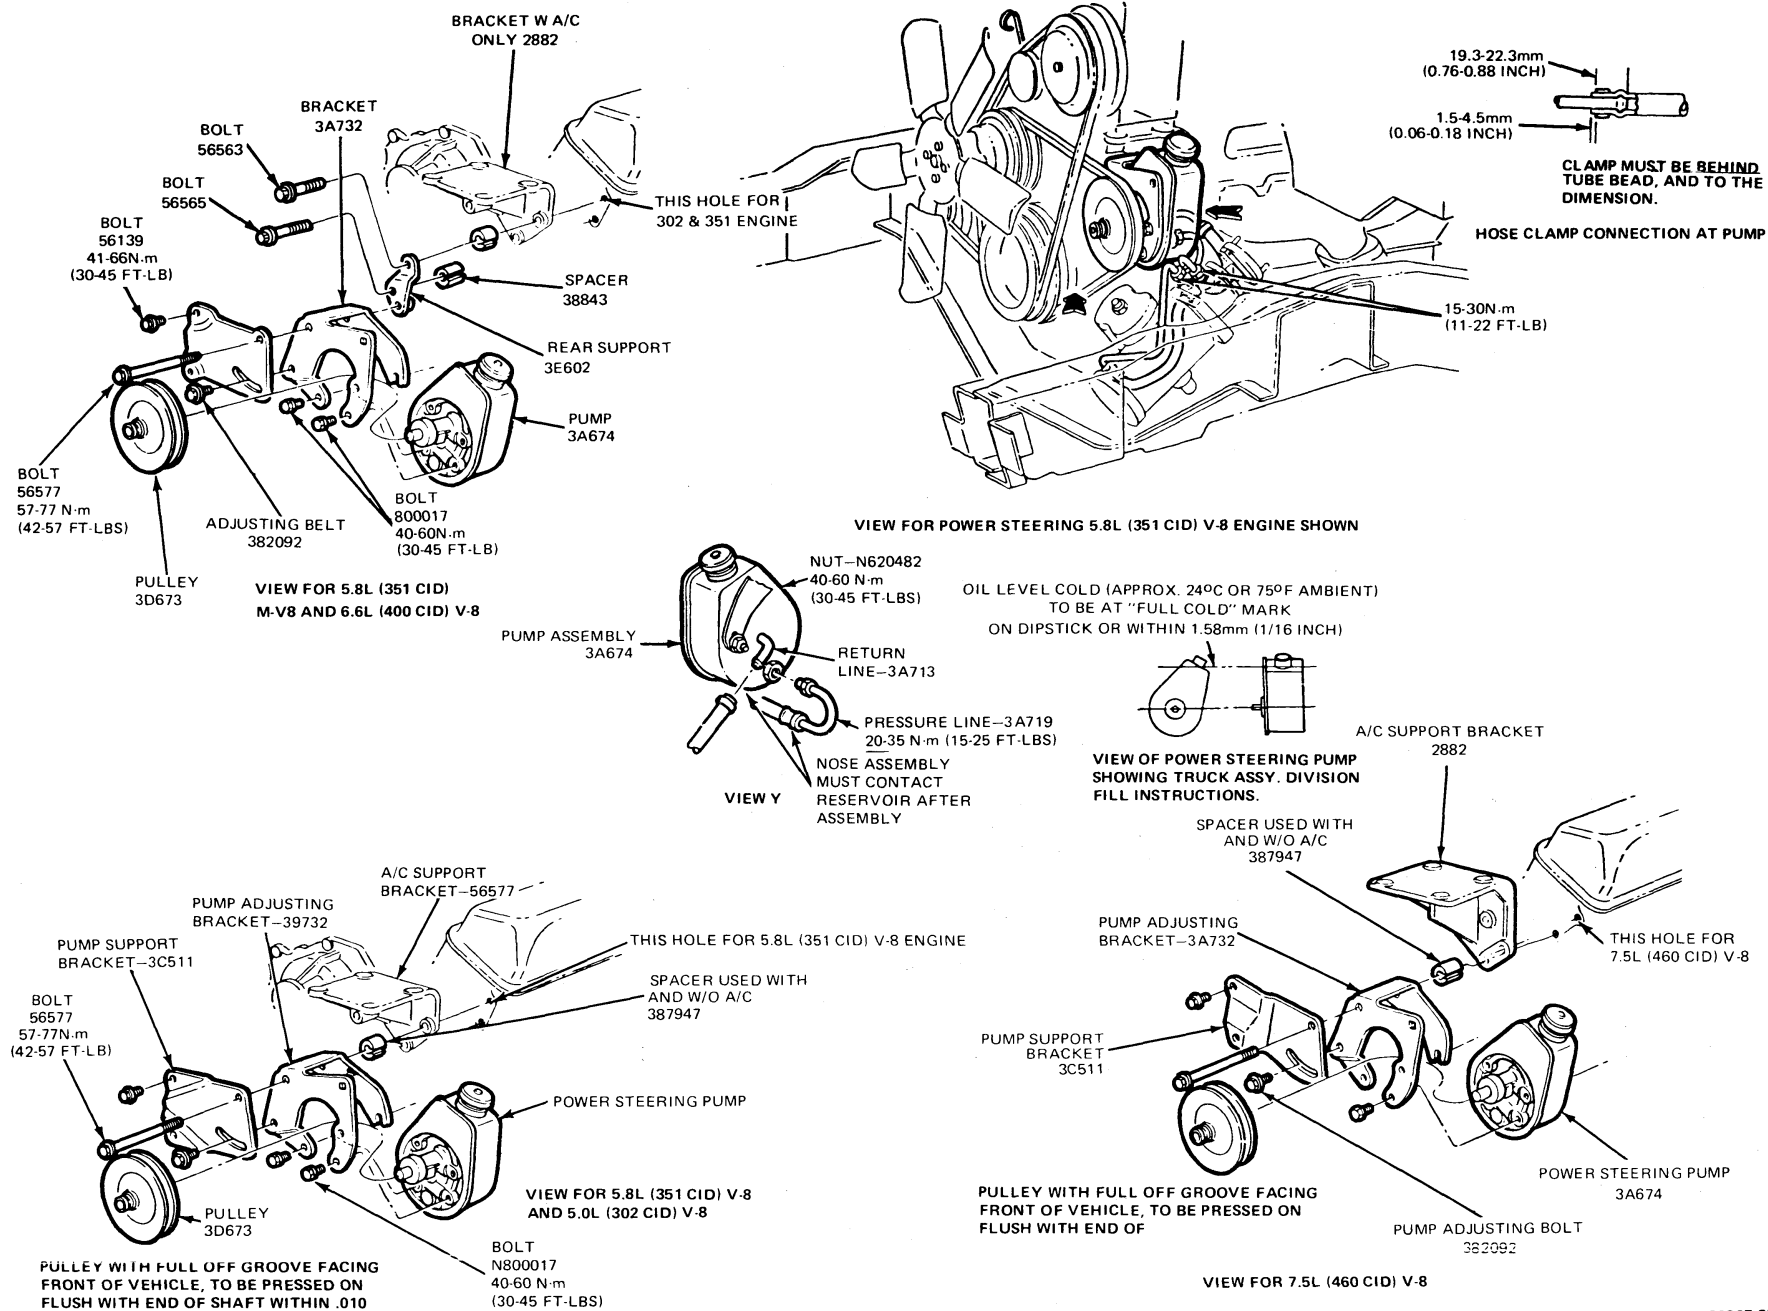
Power Steering Pump Installation—8 Cylinder Engine
